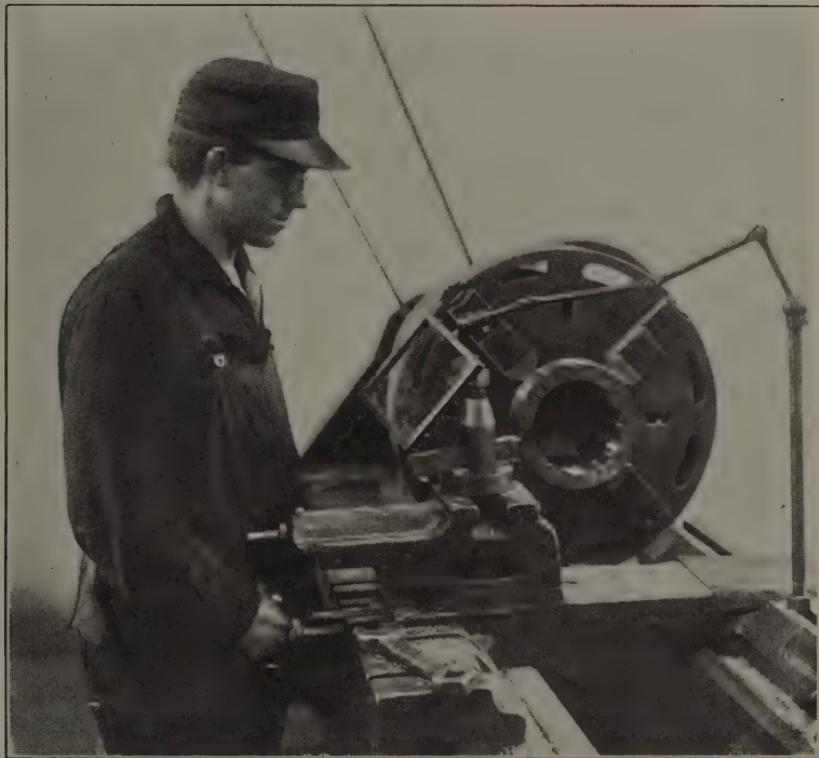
Glass chip-shield on lathe. Shield is supported by a universal jointed arm secured to tool carriage, so that it can be readily adjusted. United States Steel Corporation.
